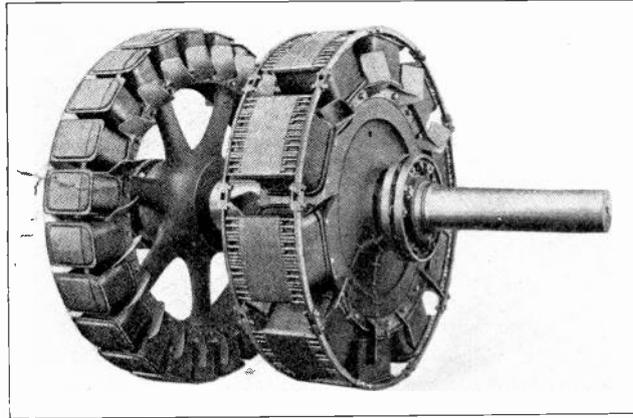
Double rotor of a frequency changer motor-generator set. The ten-pole rotor operates on 25 cycles and the 24-pole rotor produces 60-cycle energy. Courtesy of Allis-Chalmers Mfg. Co.
